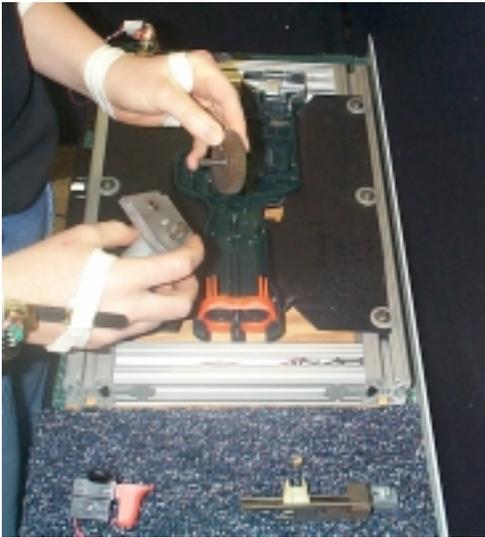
Close-up view of hands, monitors, and saw parts during assembly/disassembly task.
